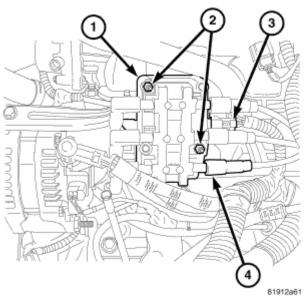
Ignition Coil Pack 3.8L Courtesy of CHRYSLER LLC
